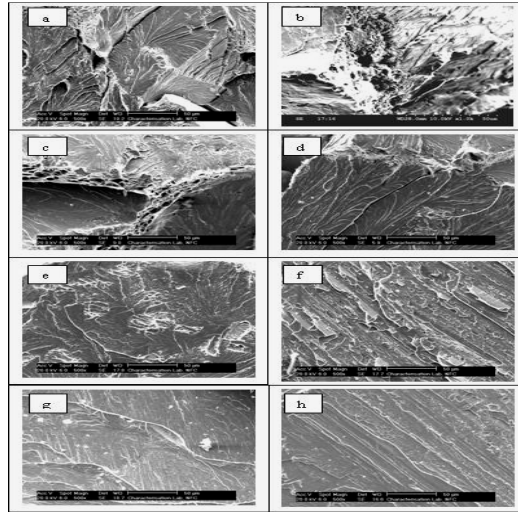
Fractographs of tensile (a, b, c, d) and impact specimens (e, f, g, h) of ferritic stainless steel weldments in post-weld annealed condition
